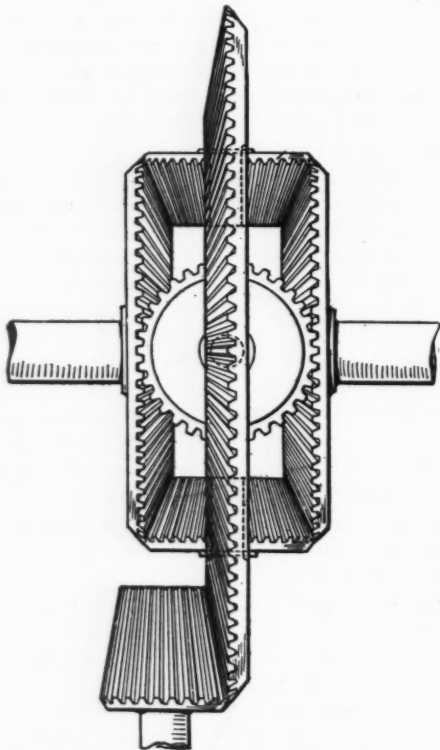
Assembly of the bevel gear differential, showing the relation between the component parts. The pinion gears are idle except when the wheels are not turning at the same speed
